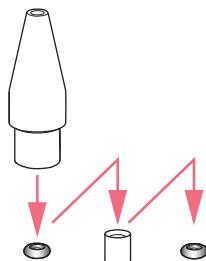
Cross-section of the grip head with correctly inserted o-rings and distancing sleeve
